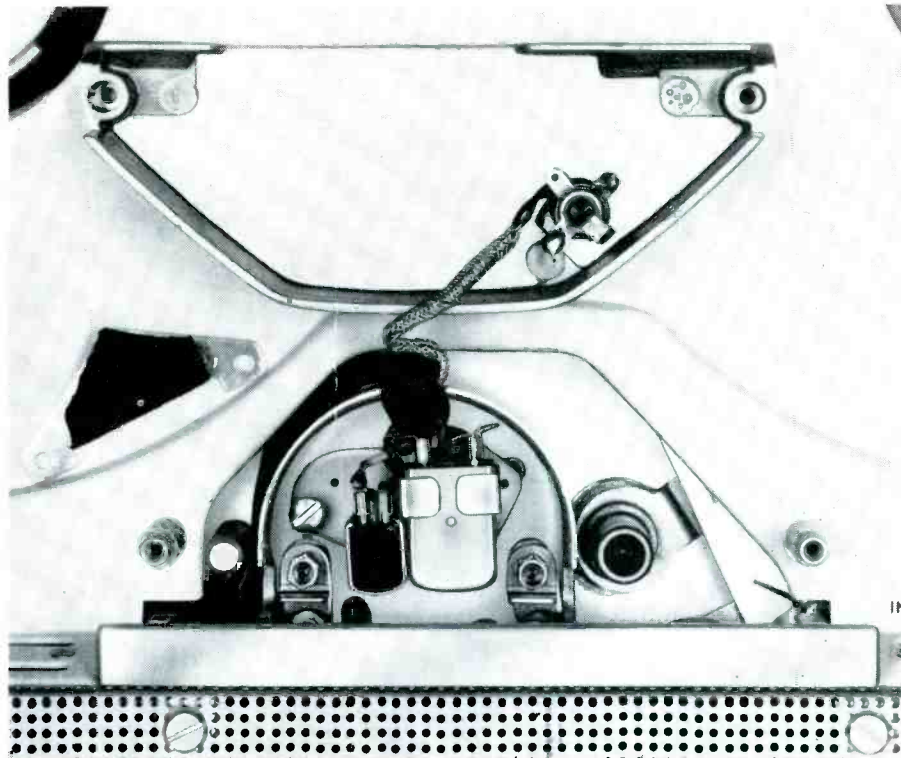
View showing new head assembly mounted in place on Wollensak T-1500. Head cover piece is upside down, with miniature jack mounted. To left is spring clip with rubber pad cemented to underside.
